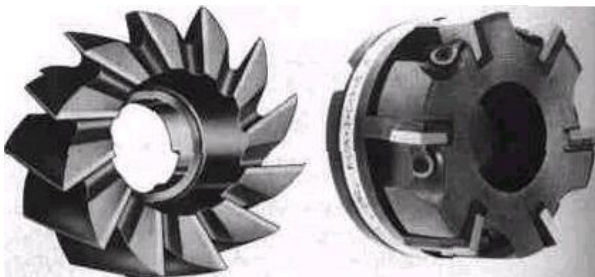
Shell end mills: one-piece type and replaceable-insert types
